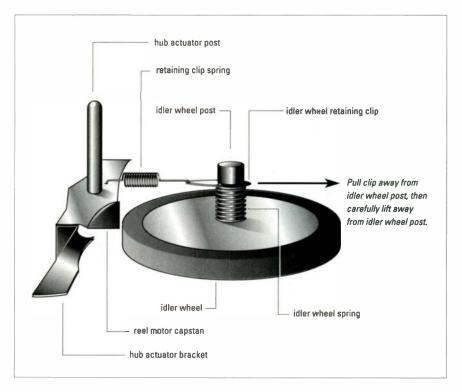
Alesis ADAT idler-wheel assembly. The idler wheel should be replaced every 500 drum hours to avoid slow-transport problems.
